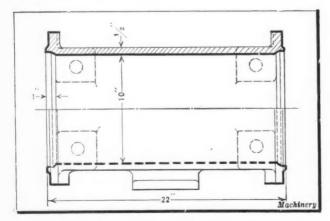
Lecemetive Power-reverse Cylinder weighing about 225 Pounds, which is machined Complete on a Turret Lathe
